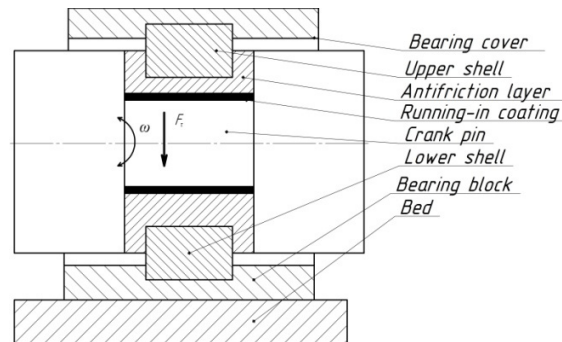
Scheme of the shaft bearing in the liquid friction exert crucial influence to its performance
